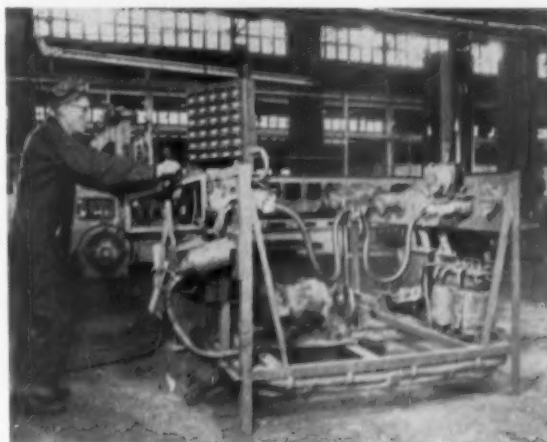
A side view of the tester showing the sequence lights in front of the operator and the motor-driven cable oscillator
